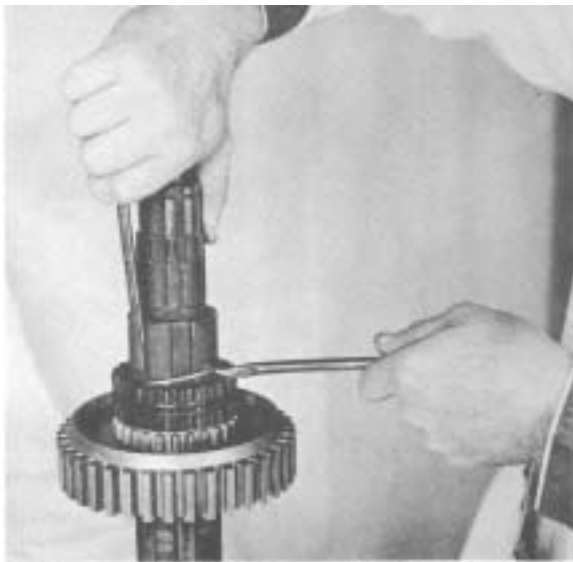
Remove 2nd & 3rd shift hub sleeve retainer ring.
